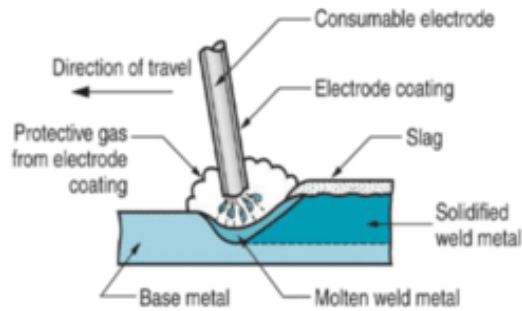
Shielded Metal Arc Welding (SMAW) method.[22]
